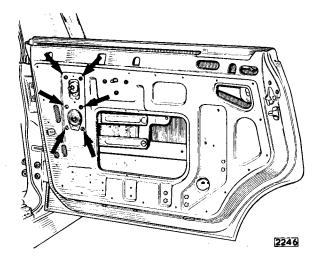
The screws securing the rear window winding mechanism to the door frame.
